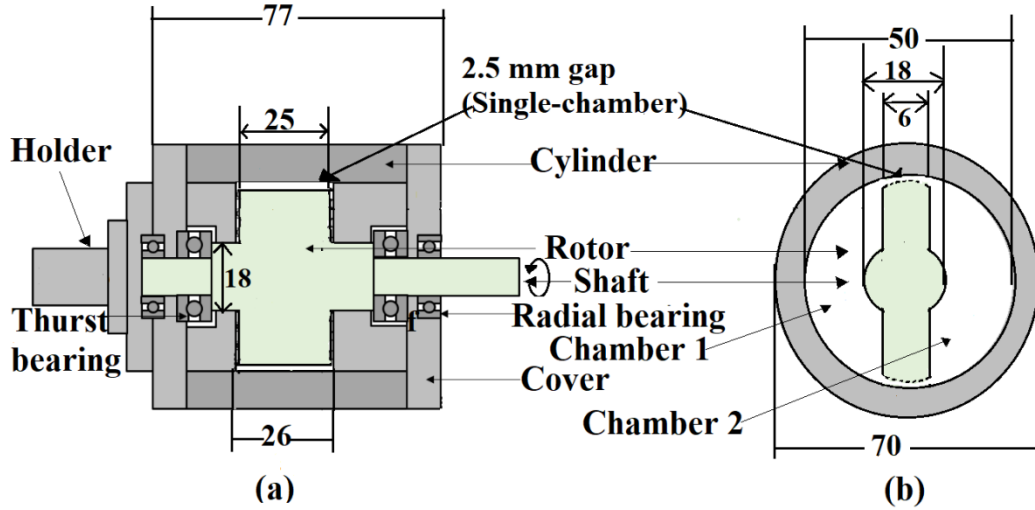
Schematic diagram of the double-chamber rotary damper. (a) Cross-sectional side view and (b) cross-sectional top view.
